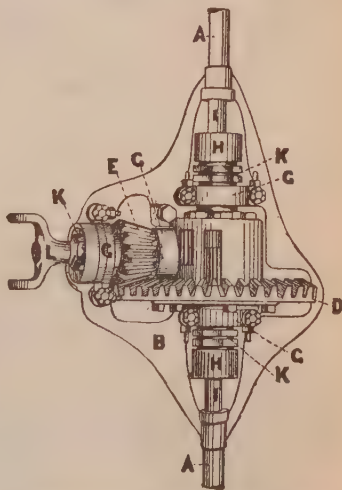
Arrangement of bevel gear for shaft drive; A and B, sleeve and case for axles and gears; D, the driven gear; E, driving pinion; G, ball bearings on E, H; H, universal couplings on the differential; K, K, K, adjustments; L, yoke for flexible driving shaft.
